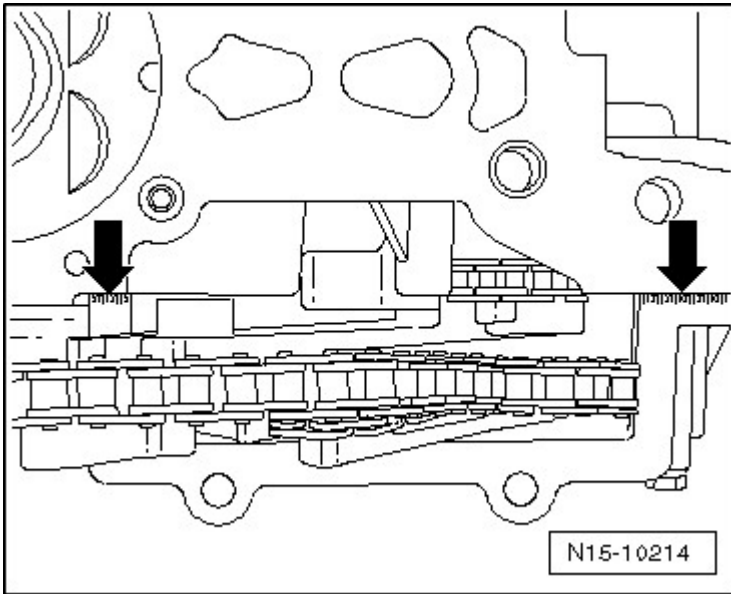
Identifying Sealant Location For Cylinder Block/Sealing Flange
